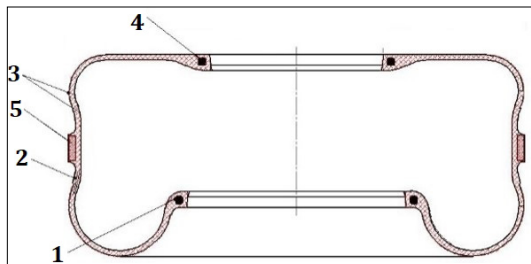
1. Large rim wire; 2. Fabrics; 3. Air barrier cover; 4. Small rim wire; 5. Rubberized belt wire.
